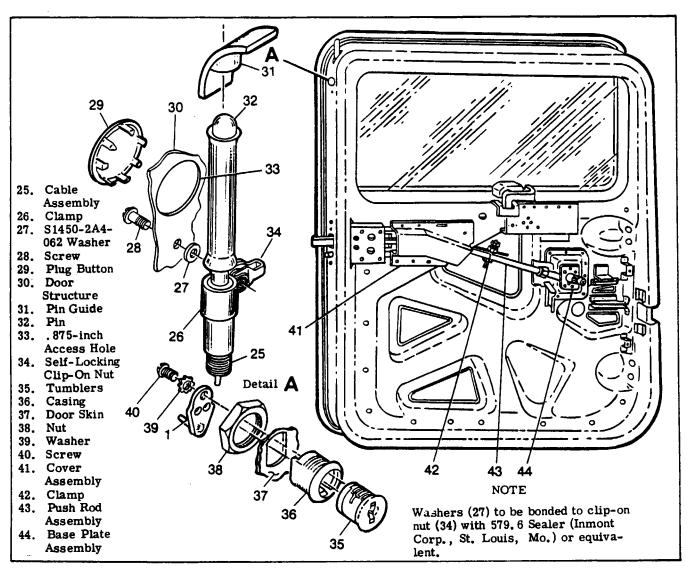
Cabin Door and Latch Assembly (Sheet 2 of 3)
